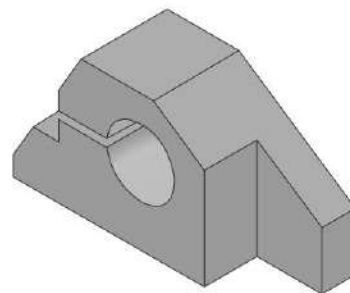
The solid after executing an extruded cut of the geometry in Fig. 4.35
